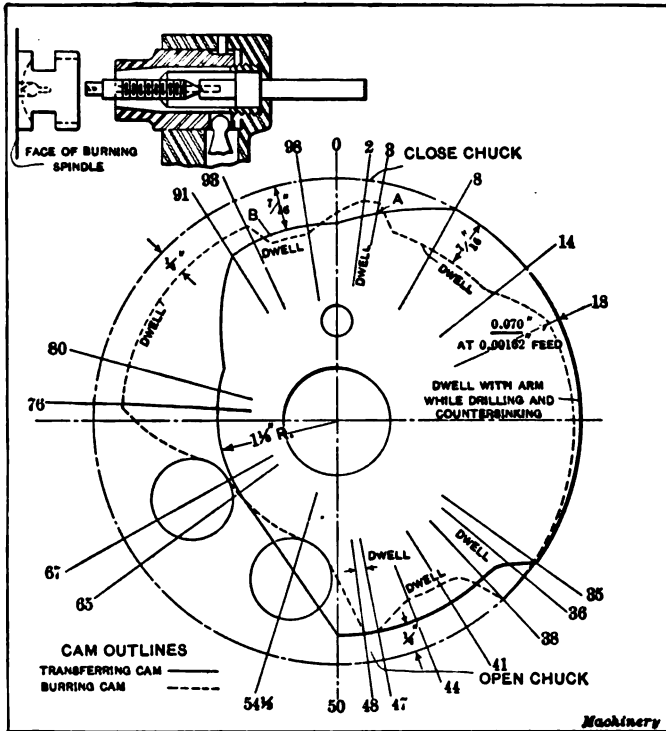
Transferring and Burring Cams for the Piece shown at A in Fig. 28
